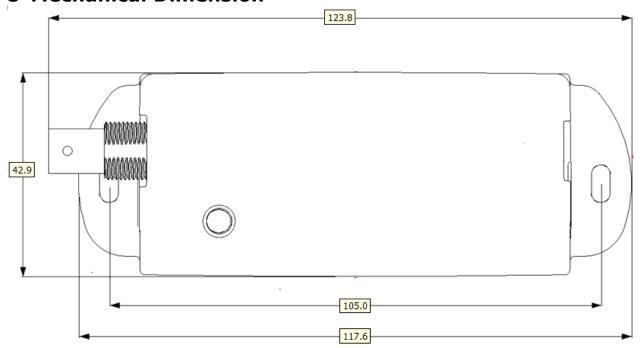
LDSBus ORP Sensor Adapter Dimension - Top View
